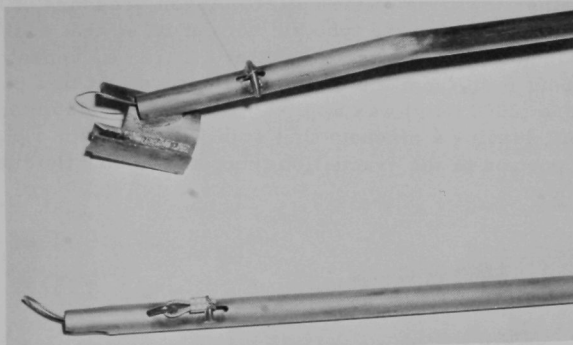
Tools for Removing Upper Clip. ANL Neg. No. 103-05236.
